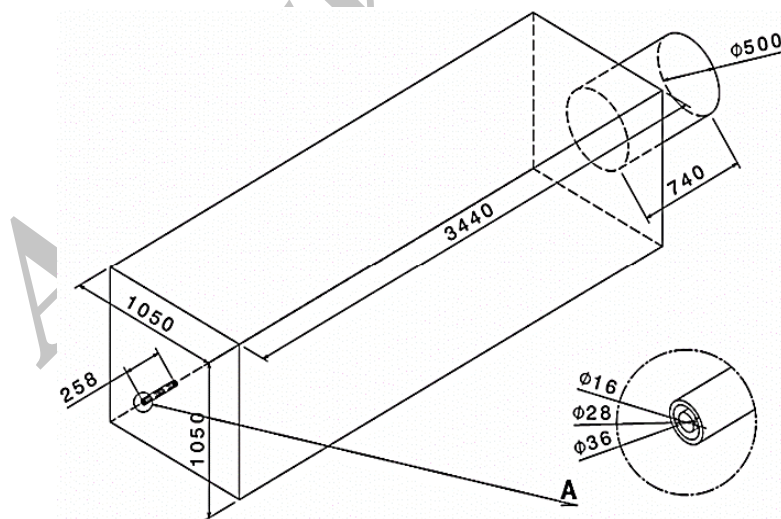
Geometry of oxy-fuel combustion and its dimensions
